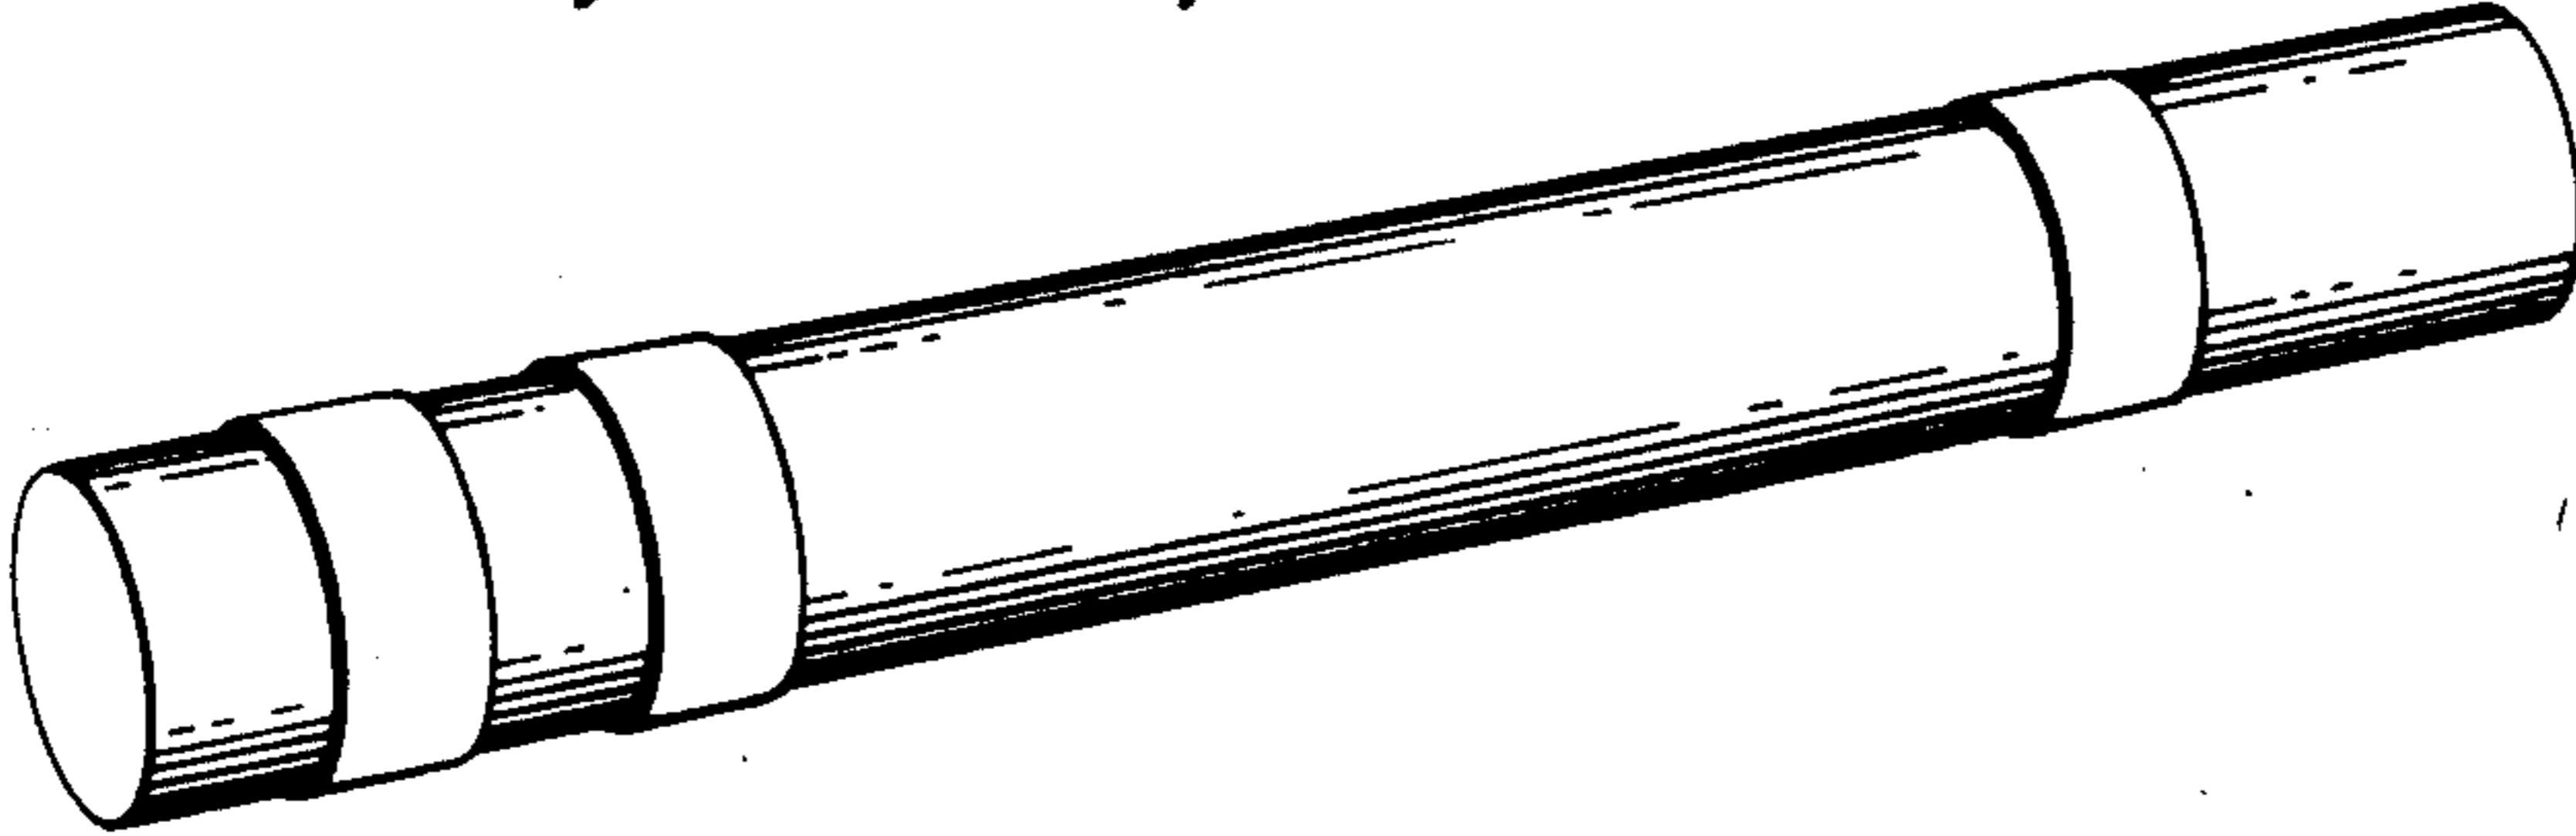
is a perspective view of a housing for a portable hand-held digital heart rate indicator device showing our new design;
